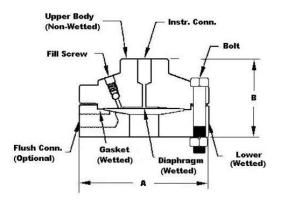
Seal Dimensions (Threaded Process Connection Seals)
